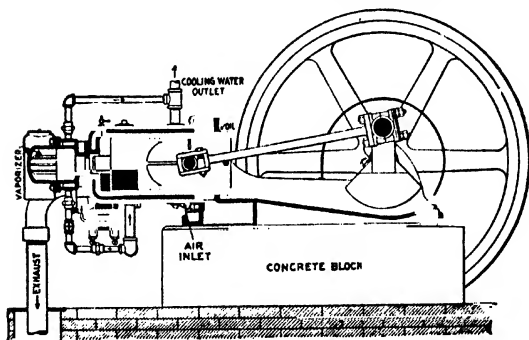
Longitudinal Section of Hornsby-Akroyd Oil Engine
